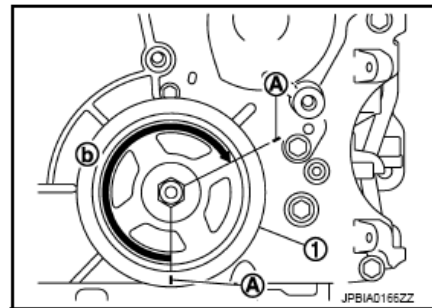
Identifying Crankshaft Pulley Bolt Aligning Angle
